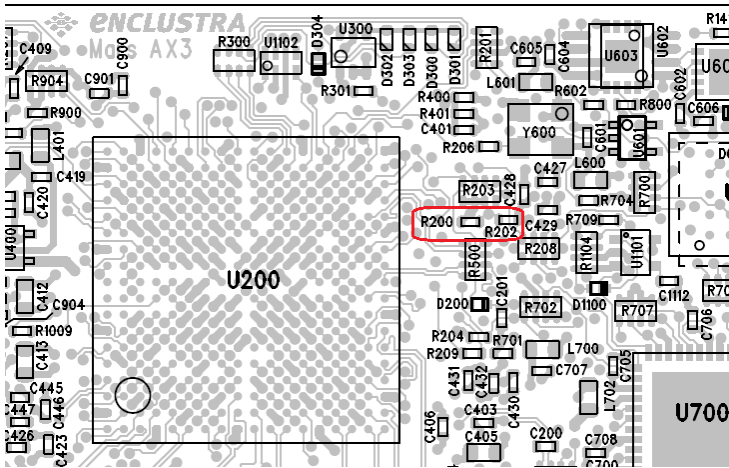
Pull-Up During Configuration (PUDC) Resistors - Assembly Drawing Top View (upper right part) for Revision 3 Modules
